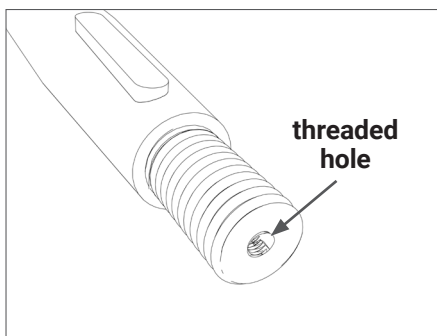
Drill the threaded hole on the shaft; it should be perfectly centred and aligned
